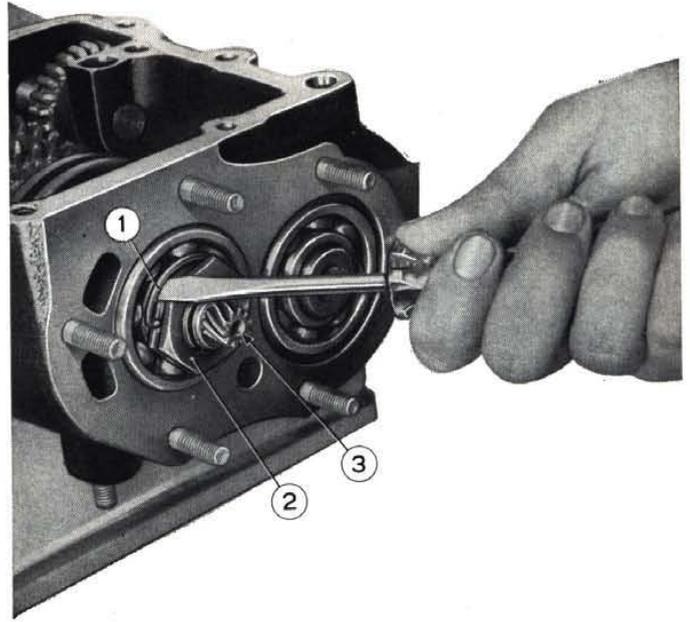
Prying out countershaft-drive pinion nut lock ring.
